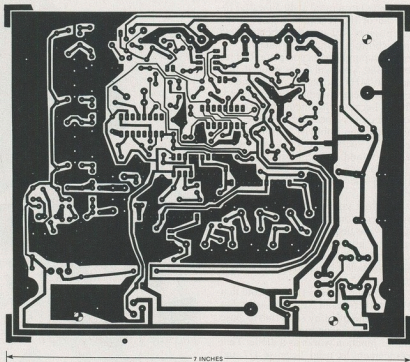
BOTTOM OF MAIN receiver board. All components connected to ground must be soldered to ground plane on both sides of board.
